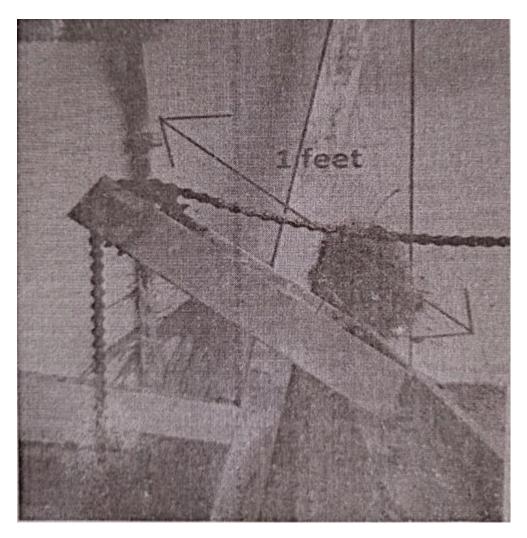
pulley inclined at 45[°] with vertical and girder fixed on the top of the wall of pit
